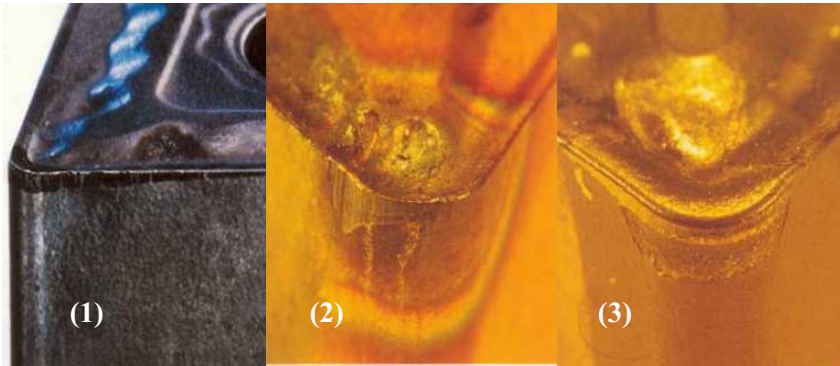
Cutting tool wear types: (1) flank wear; (2) crater wear; and (3) plastic deformation
